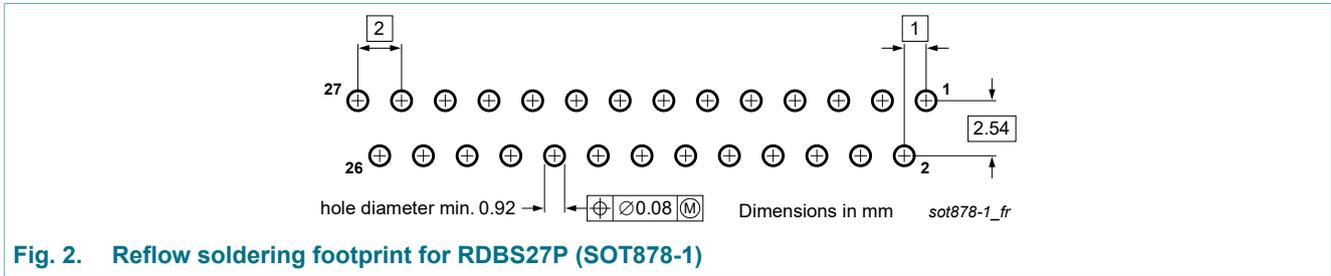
Reflow soldering footprint for RDBS27P (SOT878-1)
